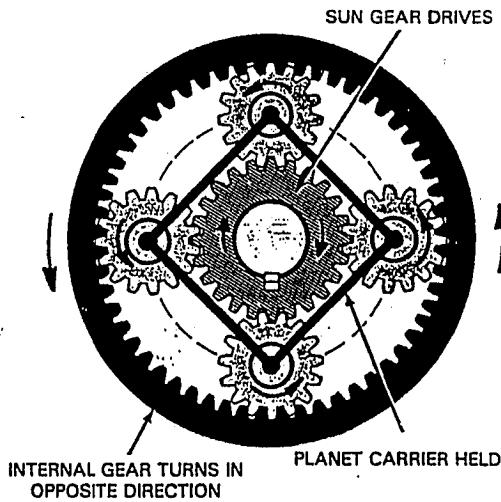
Planetary gearset in reverse. (Cadillac)
